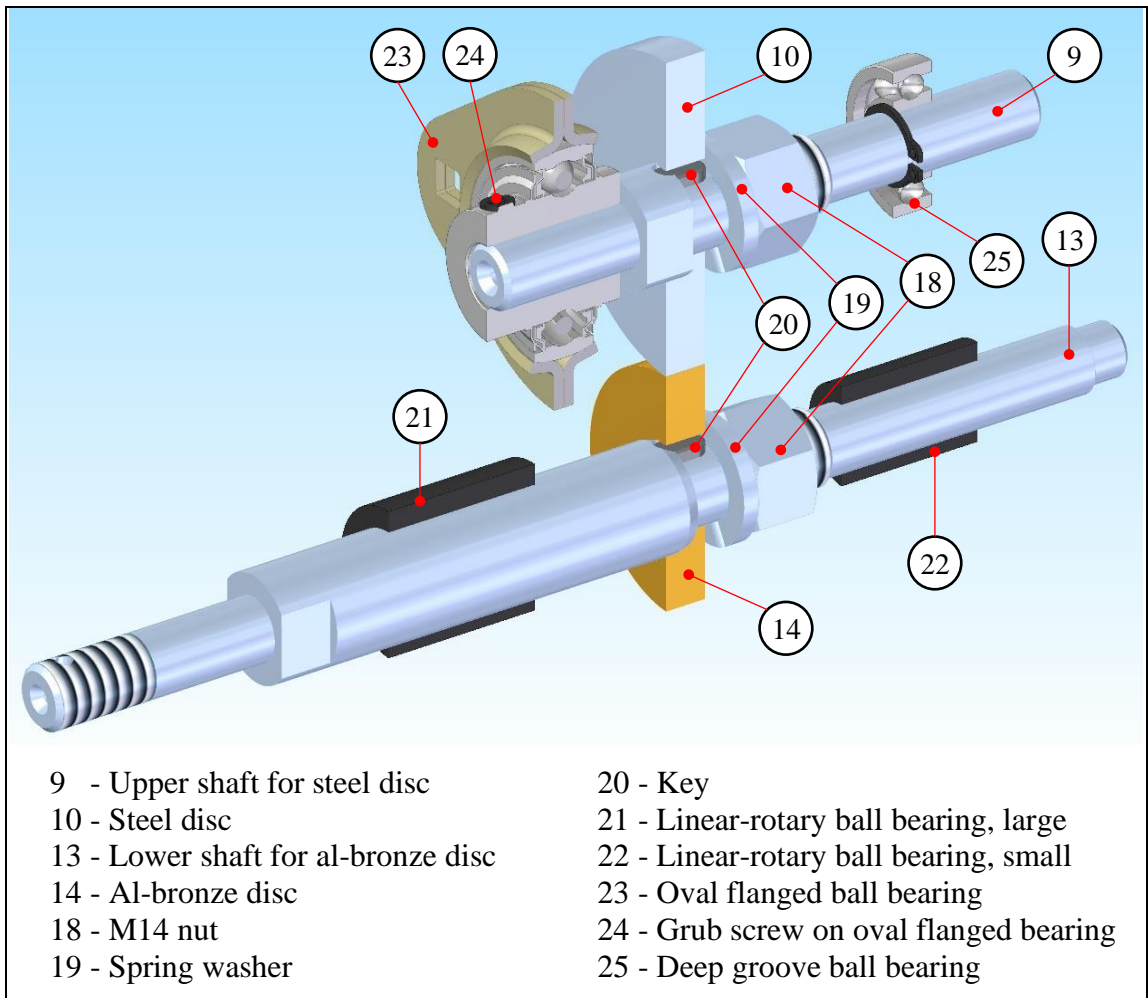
Sectioned CAD image of disc and shaft subassemblies in transverse vibration configuration.
